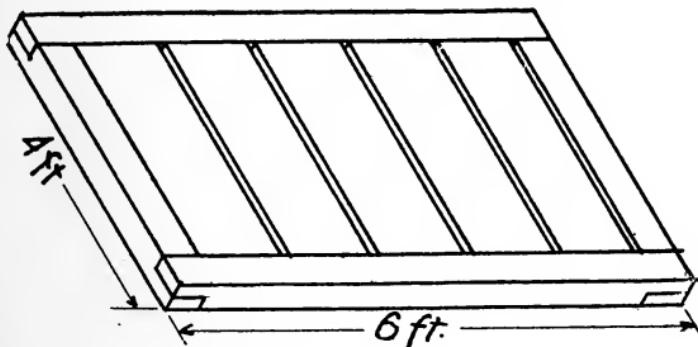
Large Flat Pattern Framed Up. Open Joints Between Boards Distributes Shrinkage and Swelling Equally
